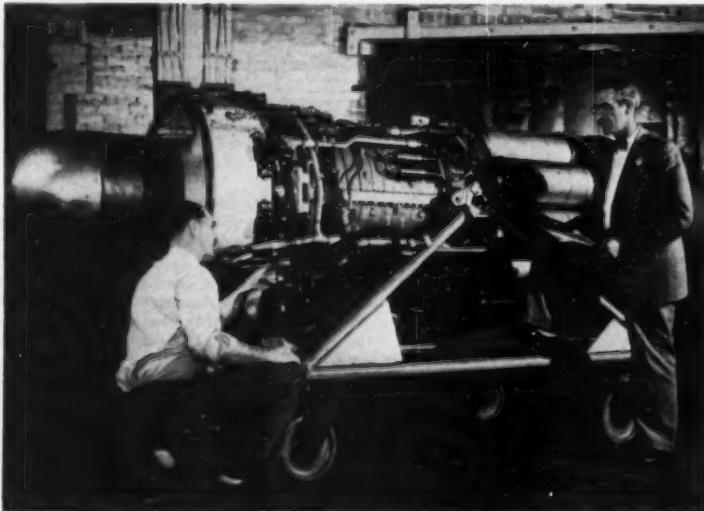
G-E ENGINEERS INSPECT ADVANCED MODEL JET ENGINE, THE J-47-GE-27, WHICH THE COMPANY IS PRODUCING FOR THE AIR FORCE
